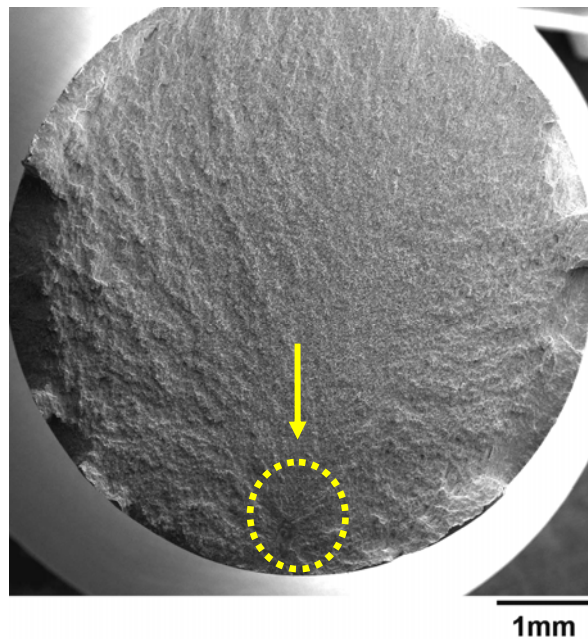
Fracture surface for fatigue specimen tested at 896 MPa failing at 4,485 cycles.
